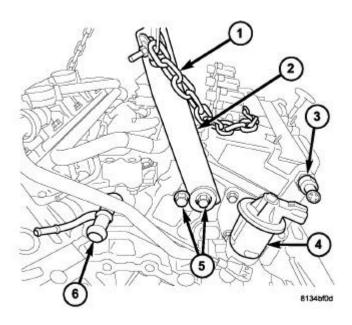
Engine Lifting Bracket, Chain, CMP Sensor, EGR Valve, Bolts & Coolant Pipe Courtesy of CHRYSLER LLC
